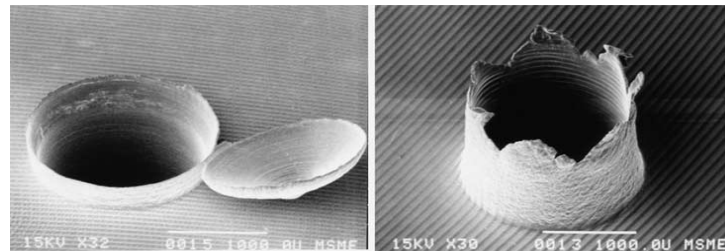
Two types of drilling burr of AISI 304L. (a) Uniform burr with drill cap; (b) crown burr [18]
